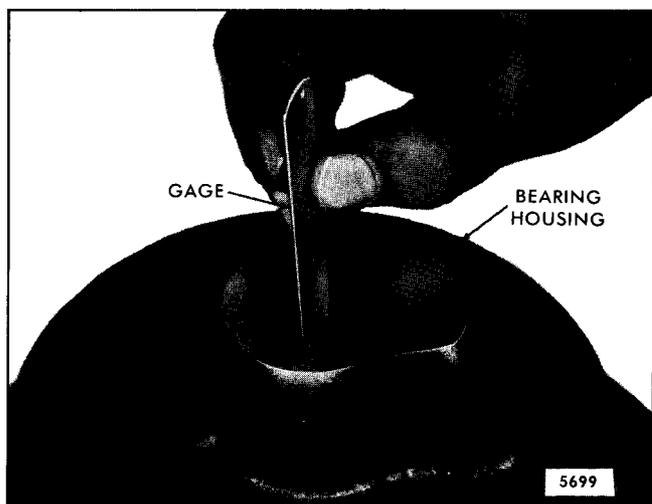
Checking Turbine Seal Ring Gap in Bearing Housing
